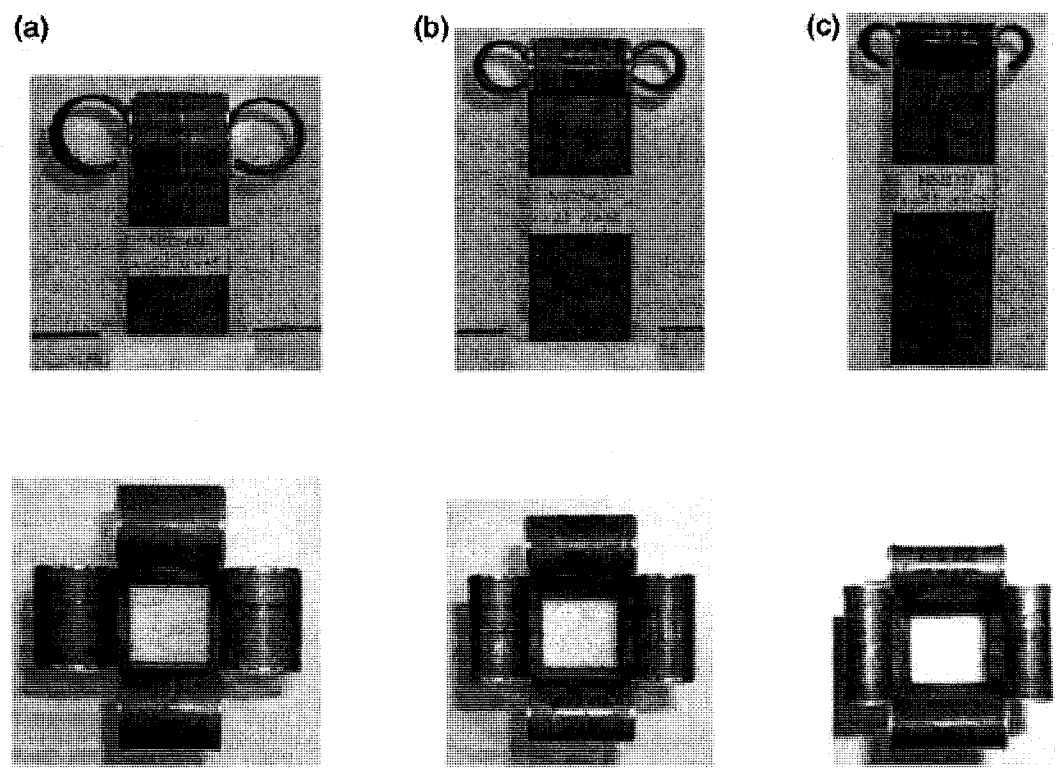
Photographs of typical mild steel specimens after test [20].
